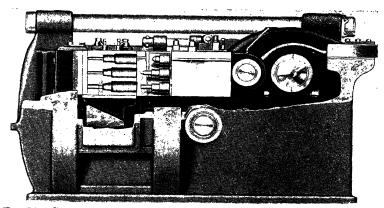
Cutaway side view of high-duty forging machine showing half of die recess and staking tools. (National Machinery Co.)
